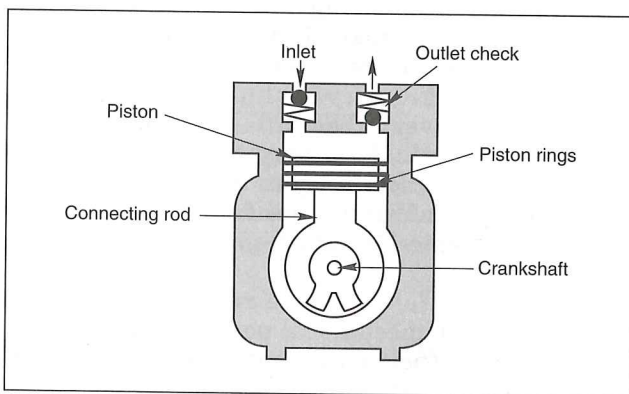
Check valves control flow direction as the reciprocating piston draws in and expels air.
